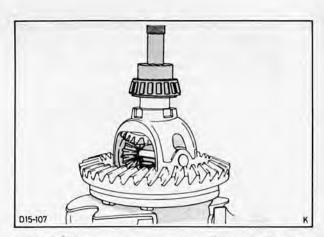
Fit taper roller bearing with special tool no. 15-025A
